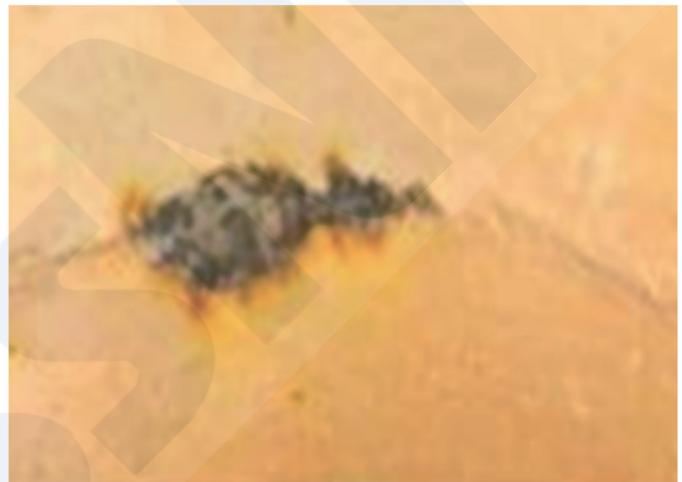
Paint peeling at butt-welded parts of distance piece of discharge water system
